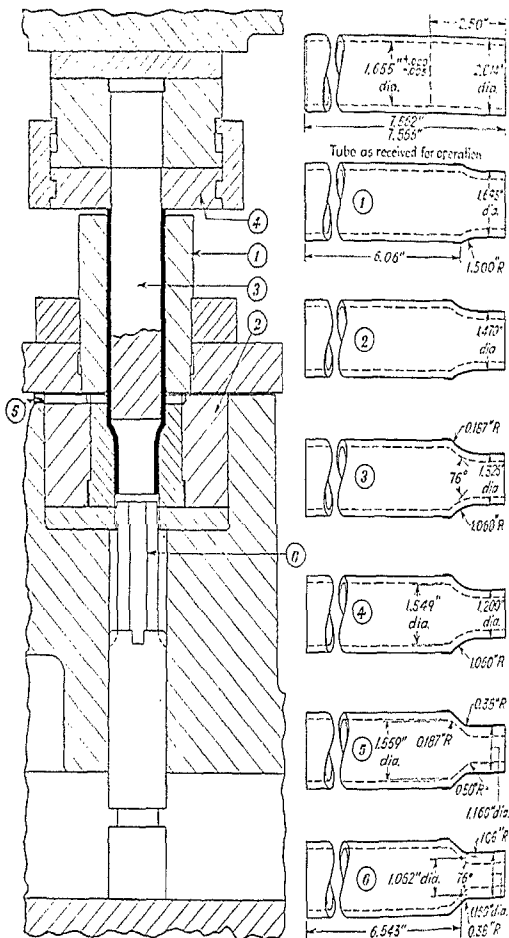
Tube necking die and the progressive shapes to which the tube is formed.
